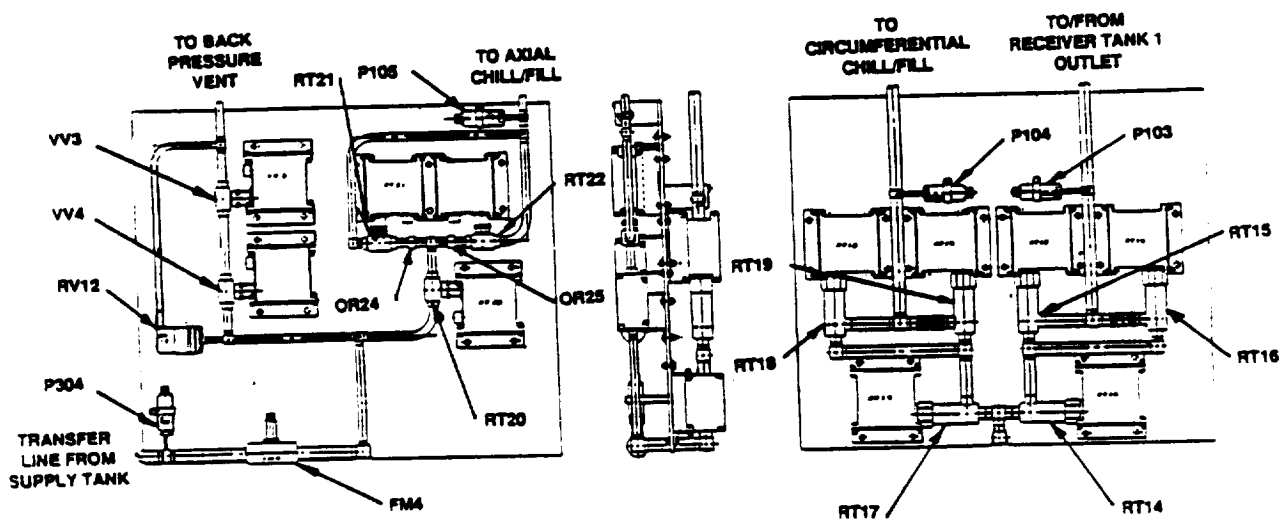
Valve Panel 7 Equipment Design Configuration
